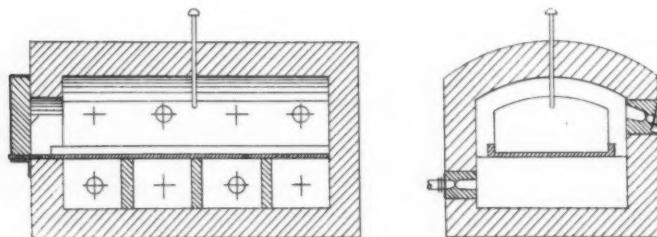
This open-fired, batch annealing furnace is fired with fuel gas. A thermocouple is placed at the center of the furnace and disposed between burners to avoid impingement.
